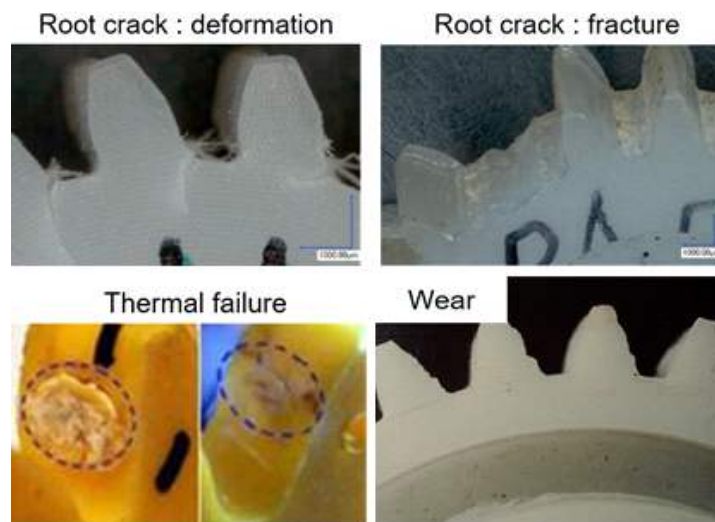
Failure modes of polymer gears [10-12]
